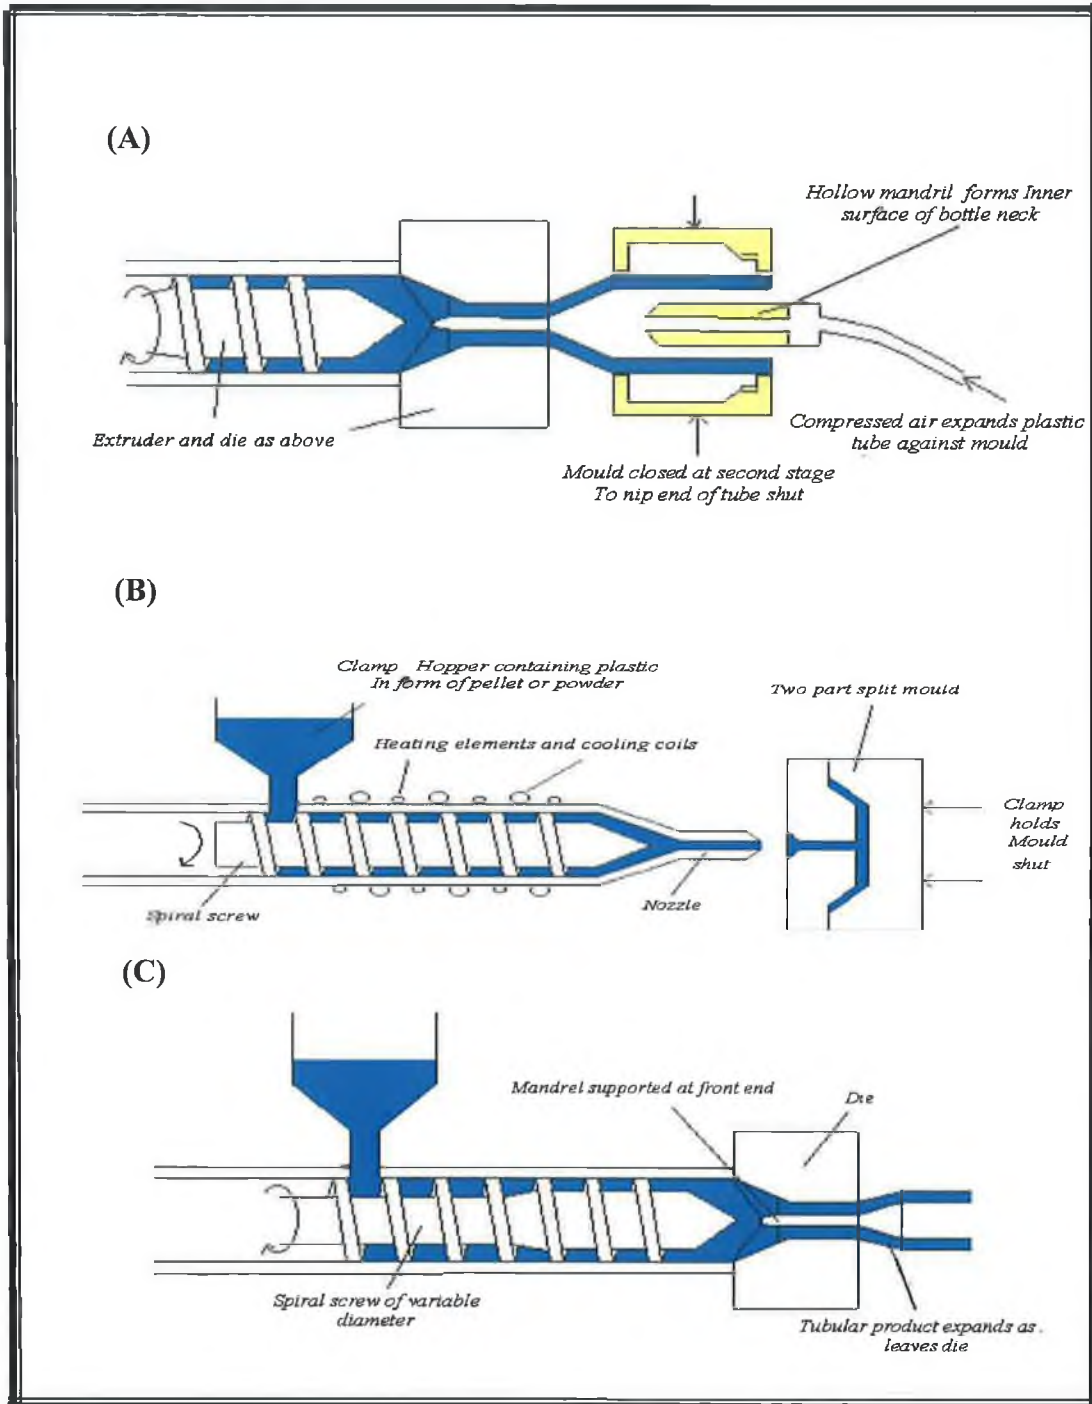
Process mould techniques, blow moulding (a), injection moulding (b) and extrusion (c) [54].
